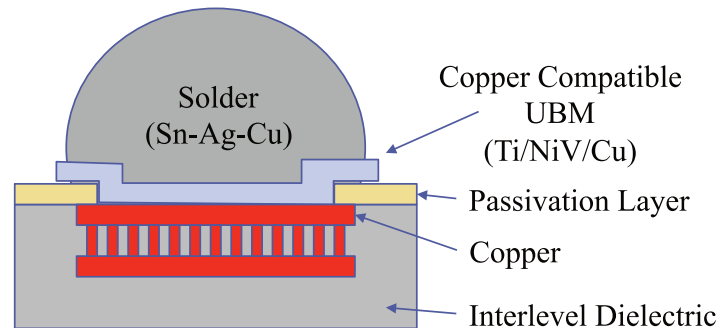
Diagram showing cross section of SAC solder bump and pad structure.
